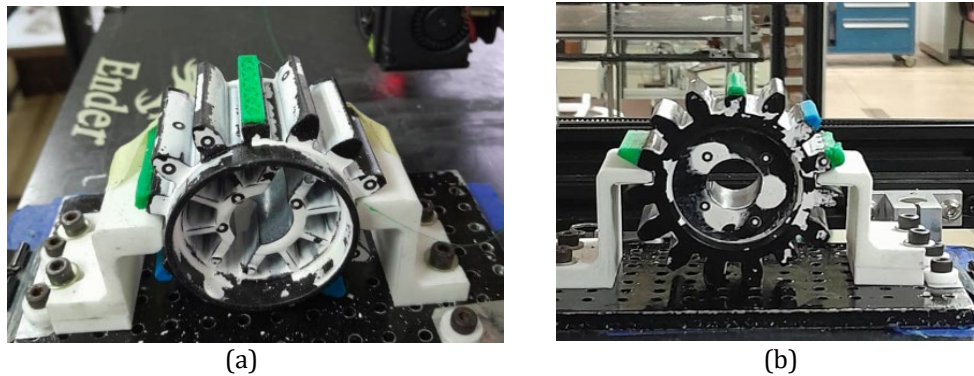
(a) Gear placement on the fixture and (b) Reconstructed broken features.
